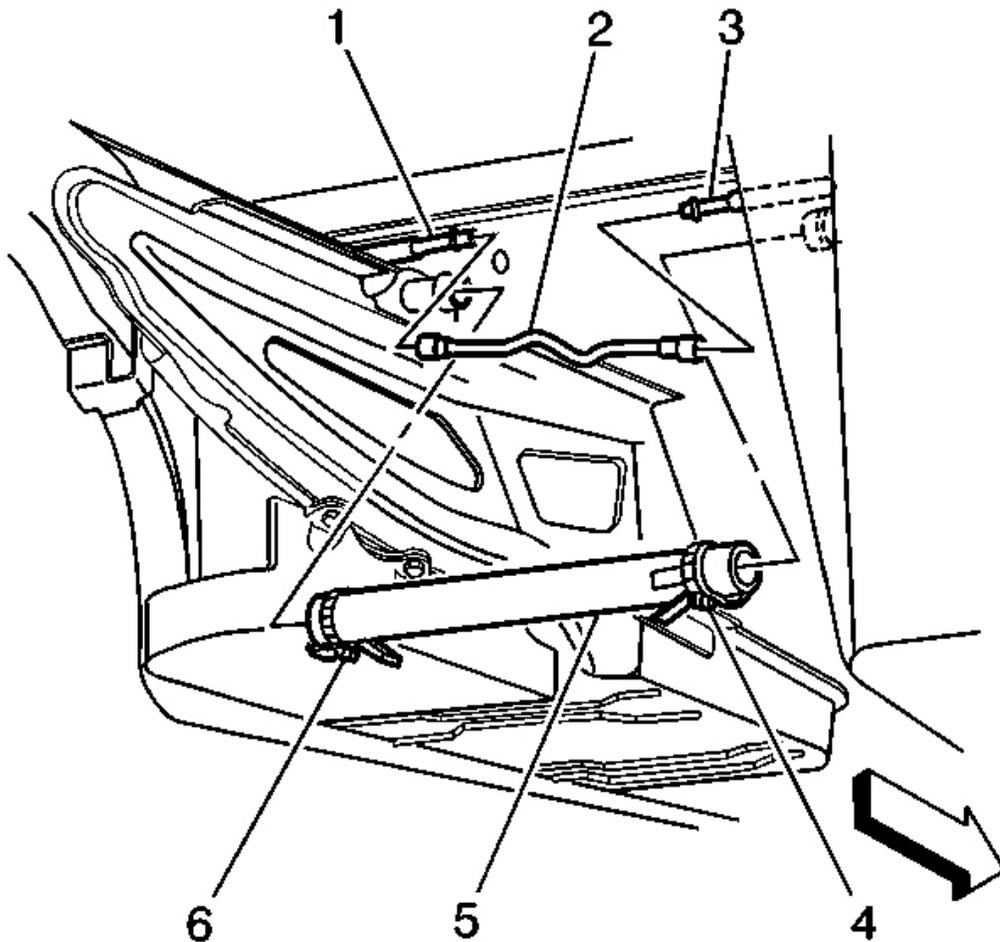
Left Fuel Tank Shield Mount & Bolt
